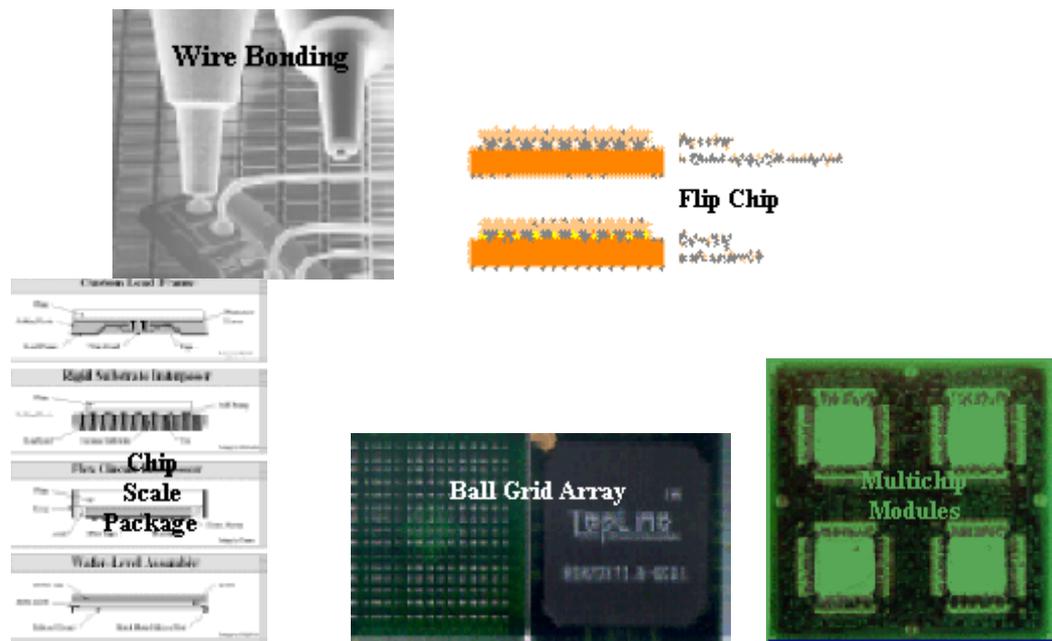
Different packaging and interconnection techniques used in manufacturing
